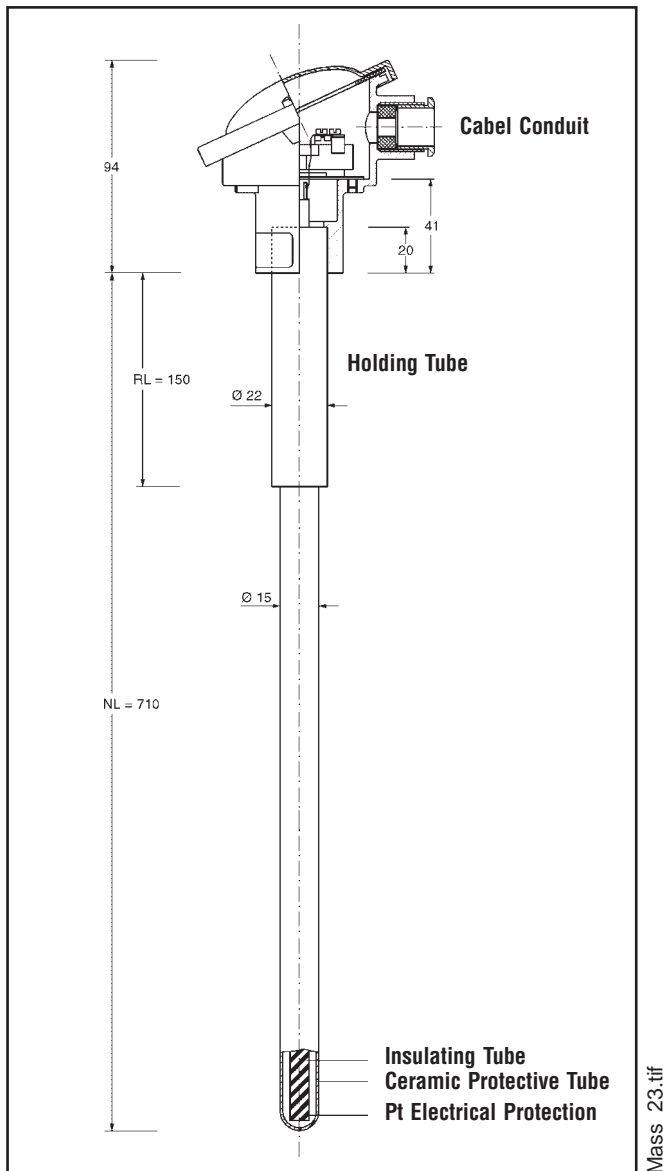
Dimensional drawing – thermocouples with electrical shielding.
